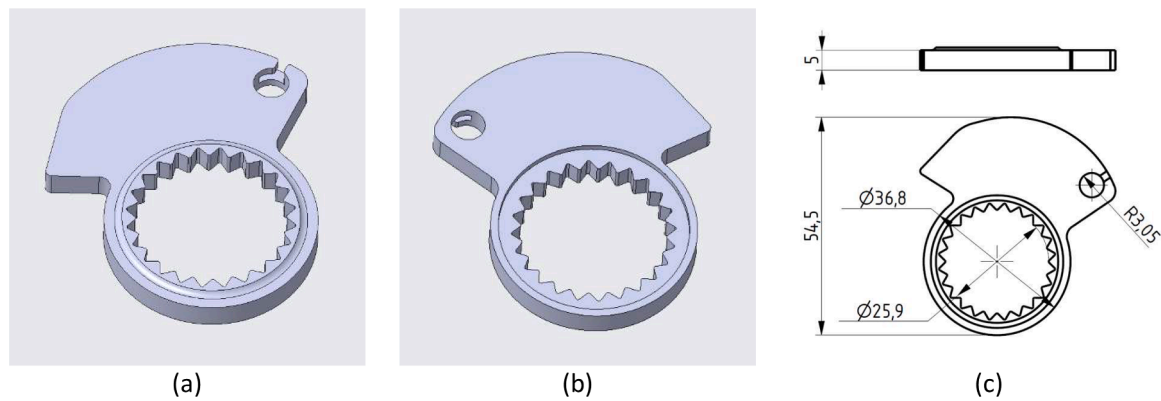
Gas cam CAD model: (a) front view; (b) back view; (c) 2D drawing of the component with the most significant dimensions.
